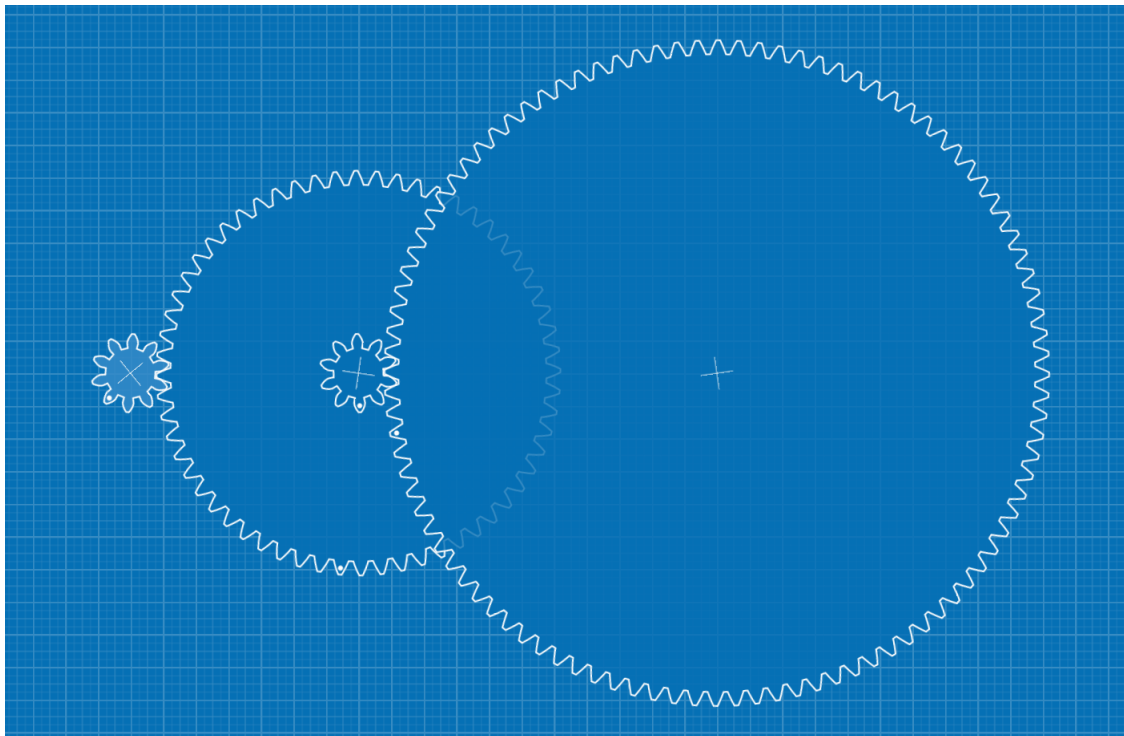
A gear train realizing the desired gear ratio $\frac{1}{60}$
